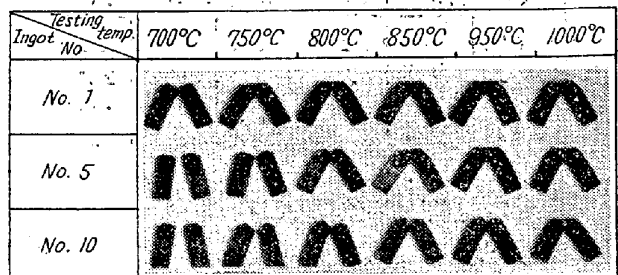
Appearances of test pieces for hot impact tests after broken.
